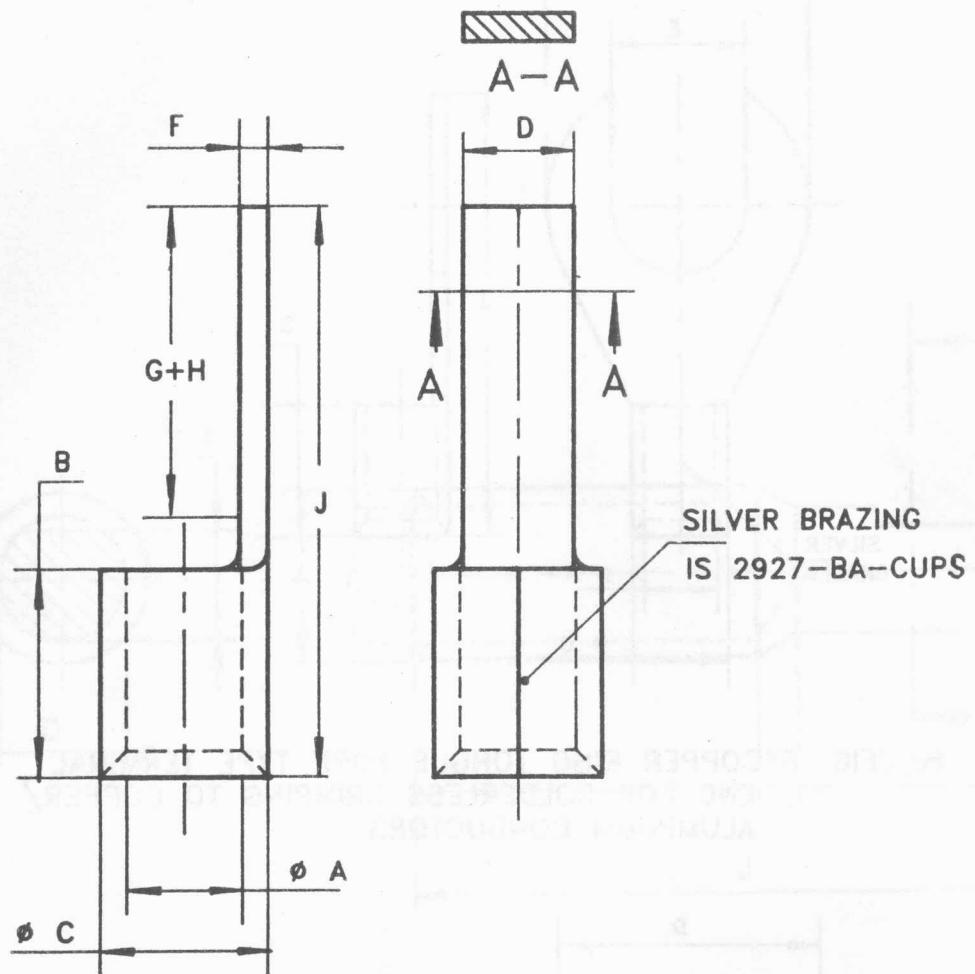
COPPER PIN TYPE TERMINAL ENDS FOR SOLDERLESS CRIMPING TO ALUMINIUM/COPPER CONDUCTORS
